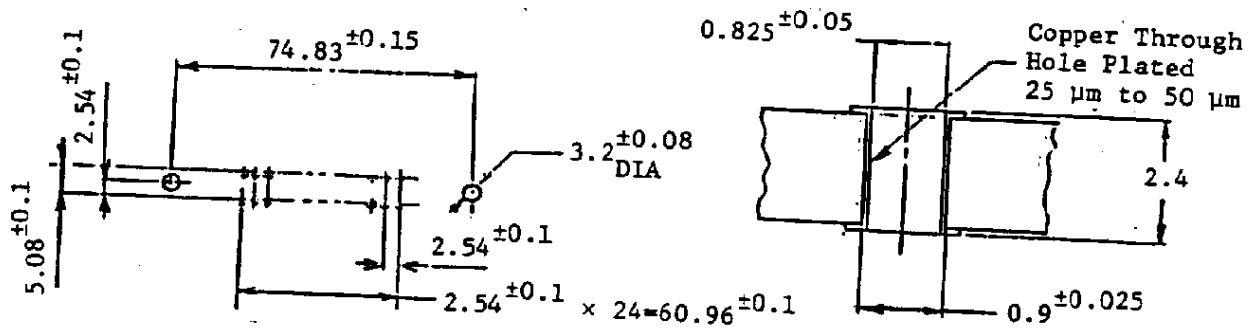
Printed Circuit Board for Testing (For Press Fitting) Unit: mm
